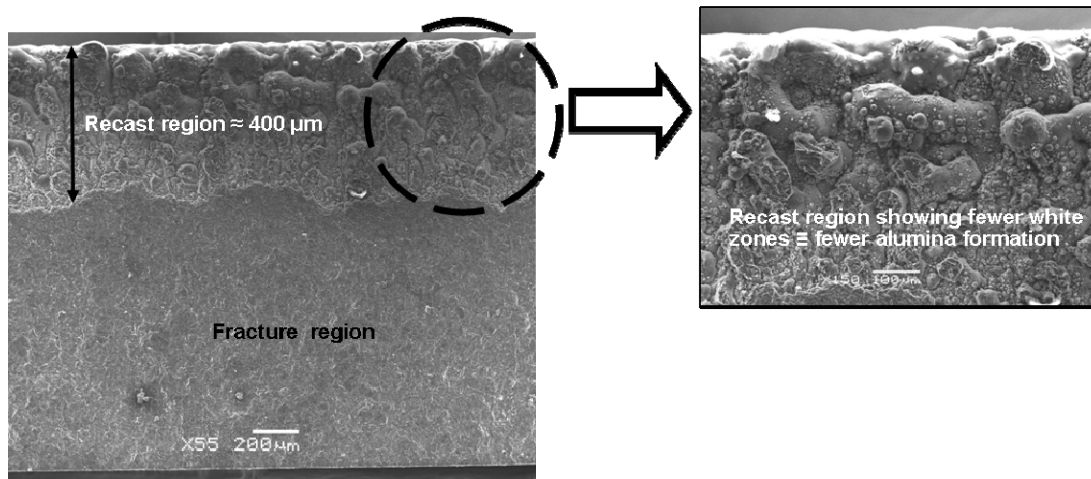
Single pass Laser cut of 1.6 mm thick CBN
